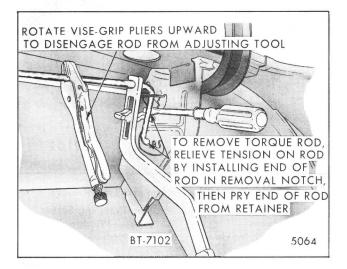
Rear Compartment Torque Rod Removal - Oldsmobile "E" Styles
